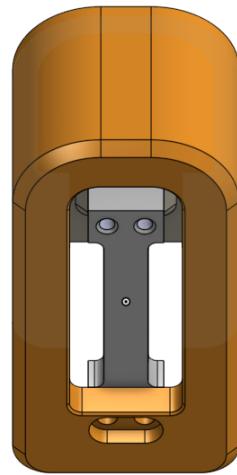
Container Shell and Load Cell Assembly (Bottom View)
